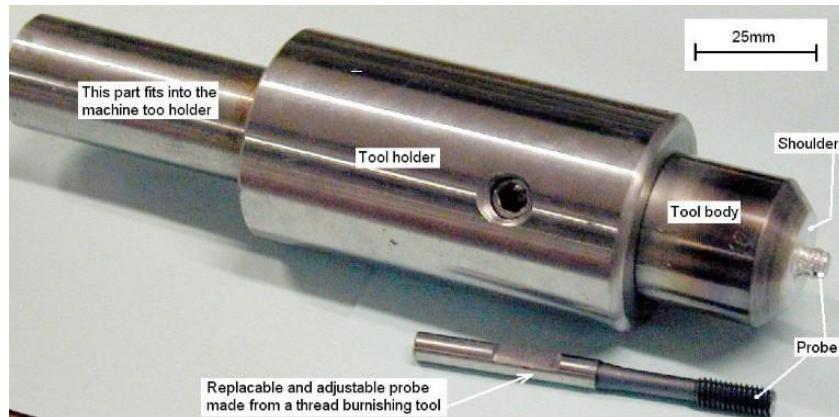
The welding tool – Courtesy of [1-27]
